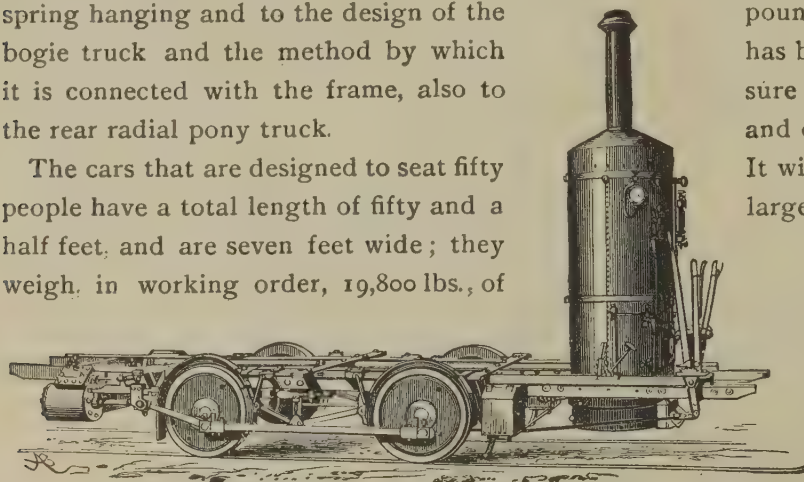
TRUCK AND ENGINE OF STEAM CAR.
